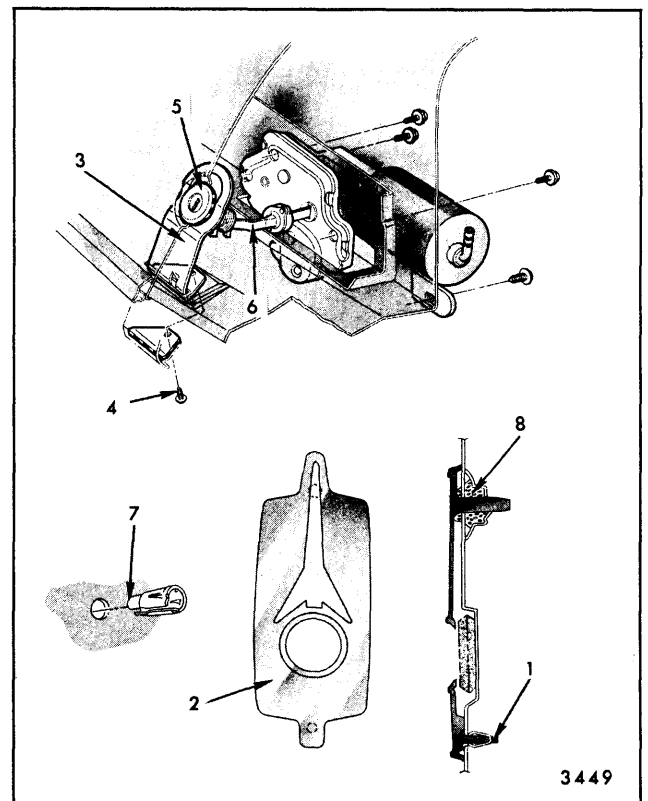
Rear Compartment Lock Cylinder and Emblem Assembly - Oldsmobile "B" Styles
